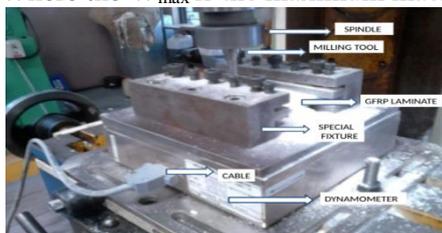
(a). Machining of GFRP laminate plate is properly fixed in machining center by special designed fixture
